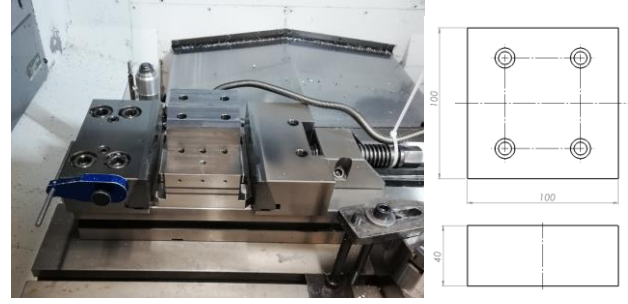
Mounted table dynamometer with a sample of size $100 \times 100 \times 40$ mm in the milling Machine 1
